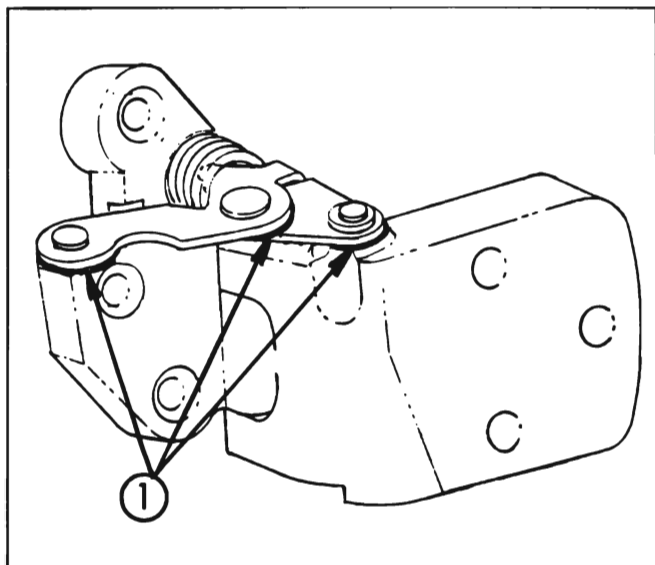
Rear Door Hinge and Hold Open Assembly
